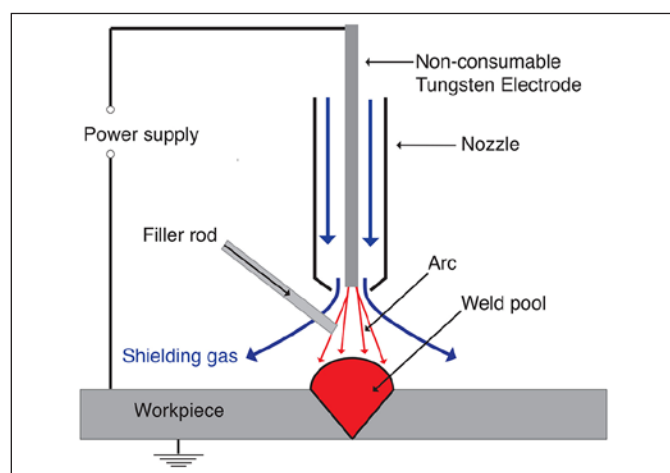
• The principles of gas tungsten arc welding.
